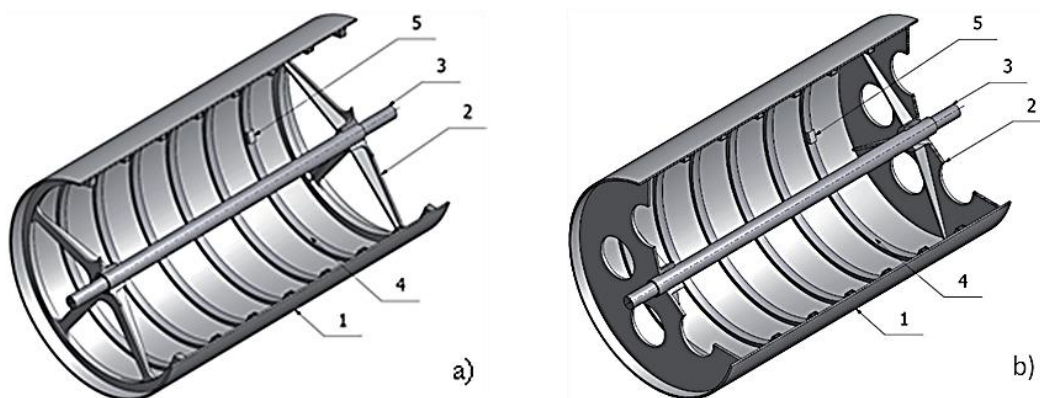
a) cylinder with cast wheel hubs, b) cylinder with welded bottoms:
